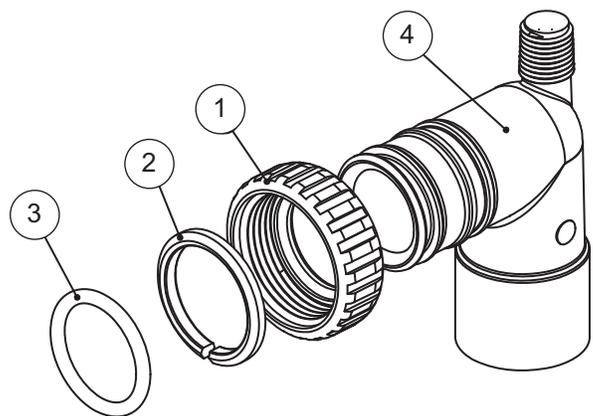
3/4" and 1" PVC Solvent Elbow Assembly - CV3007-01
